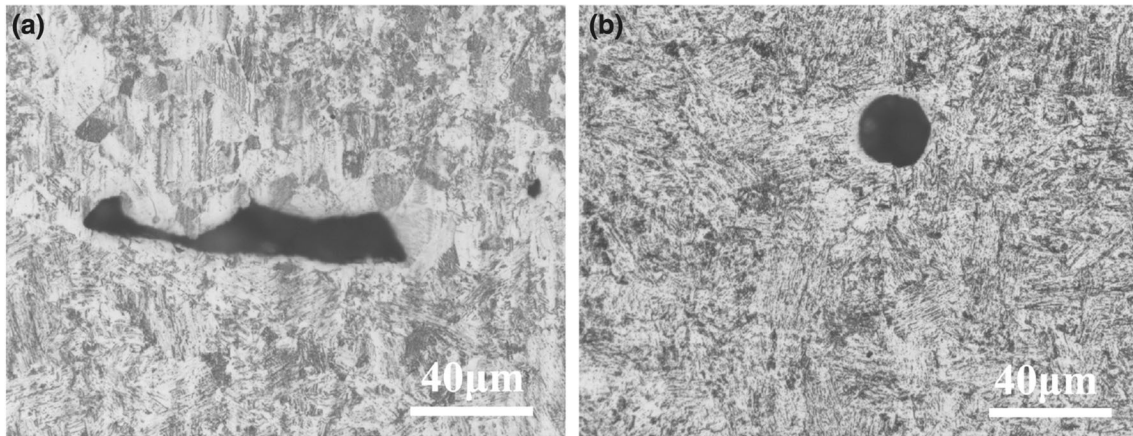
Defects occasionally observed in as-built Ti-48Al-2Cr-2Nb alloy samples: (a) lack of fusion and (b) small voids.
